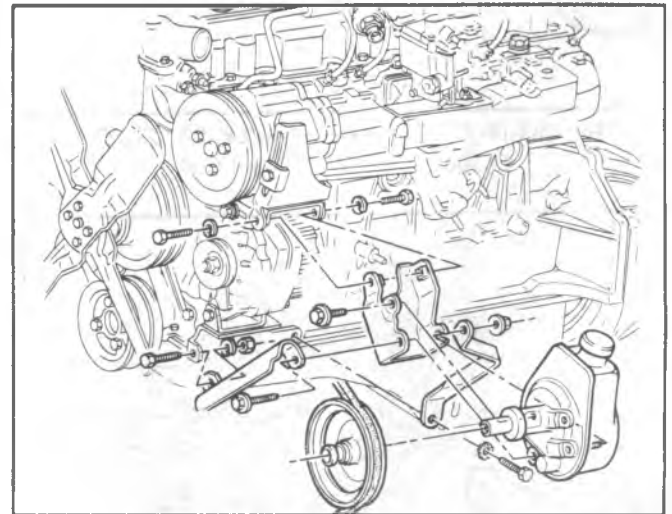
B3-16--P/S Pump Mounting; CK200, CK300 with L25 Engine
